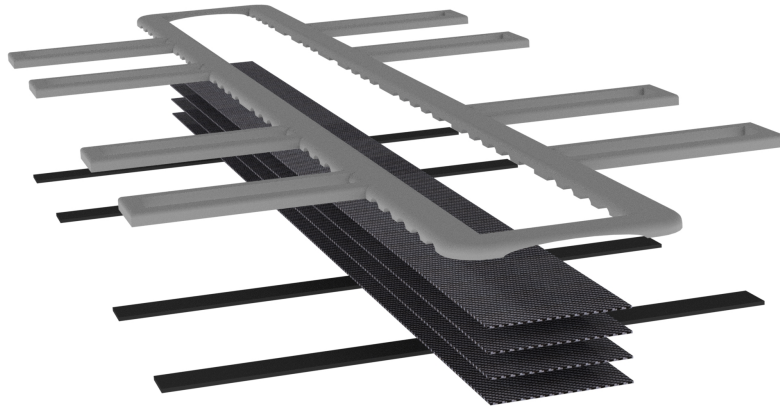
Exploded view of the mould and fibre stacking method for the CFRP-PUR composite
